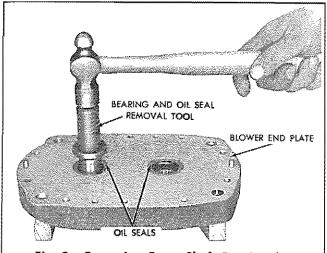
Removing Rotor Shaft Bearing from _____ End Plate
